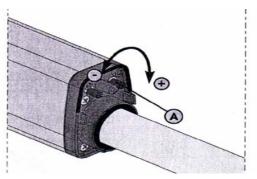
Closing (FCC) Limit Switch Adjustment Screw
